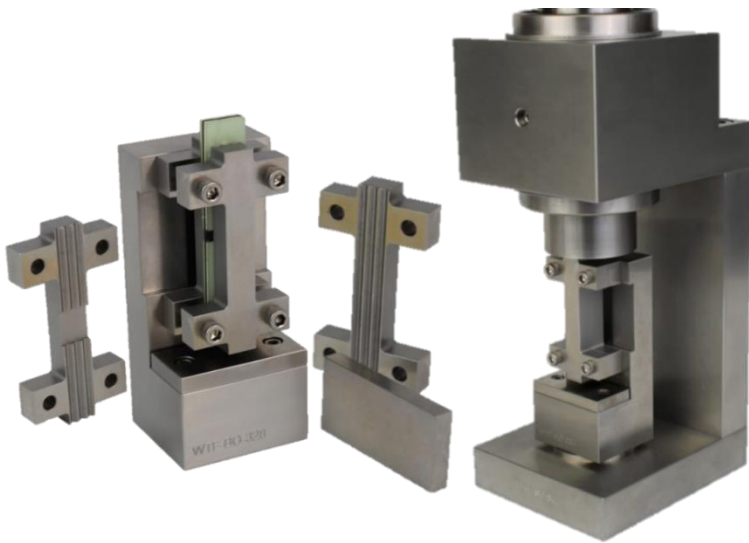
Lateral support test fixtures for use with the modified D695 and ISO 2850 test standard, produced by Wyoming Test Fixtures [76]
